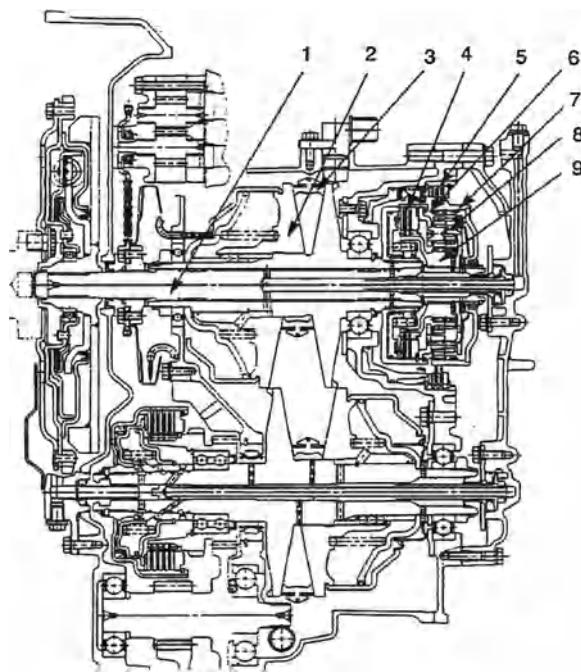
Van Doorne steel belt CVT; the gearbox is characterized by the start-up multi-disc clutch on the output shaft (courtesy of Honda)
